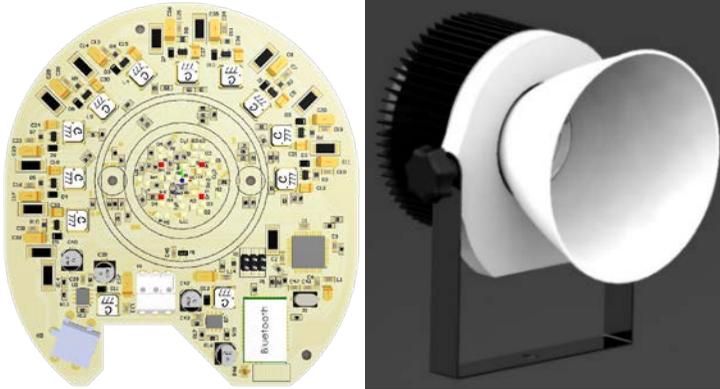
Soldered metal core printed circuit board (left) and 3D drawing of the assembled luminaire prototype (right).
